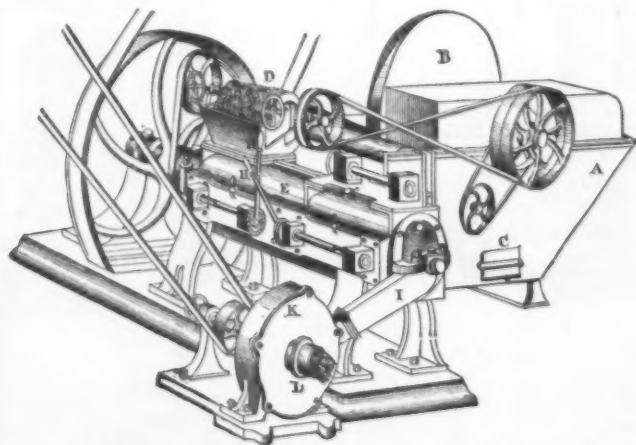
MANUFACTURE OF VERMICELLI—THE KNEADING MACHINE.
